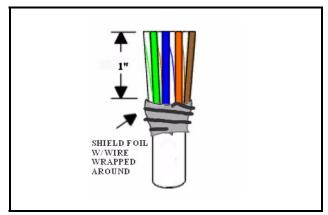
CAT5e Shielded Cable w/ 1" Stripped Jacket
